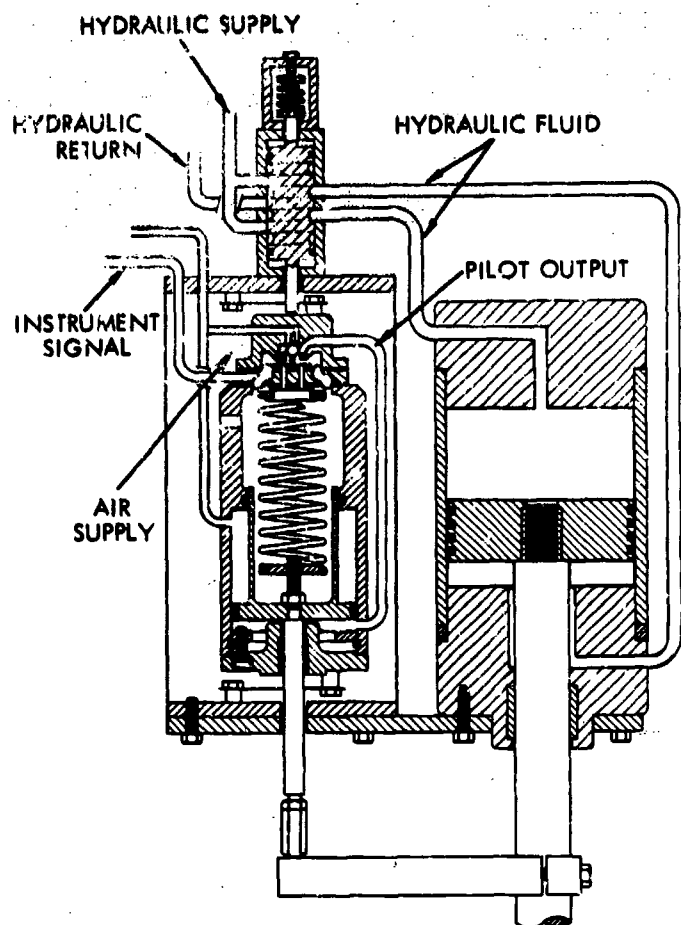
Pneumatic-Hydraulic Actuator
